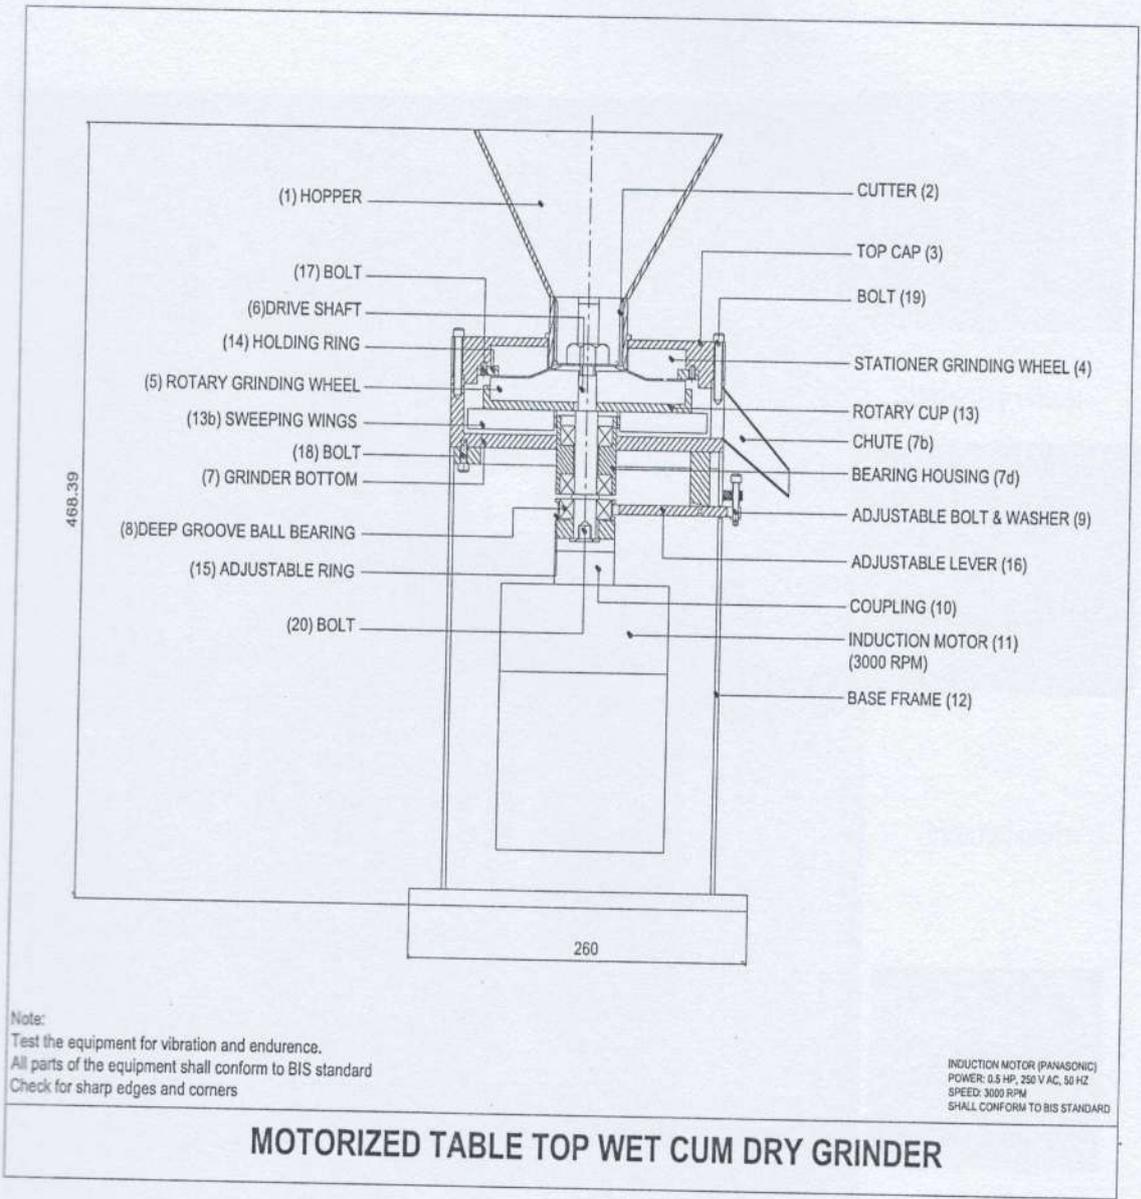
Engineering drawing of truncated conical continuous wet cum dry grinder
